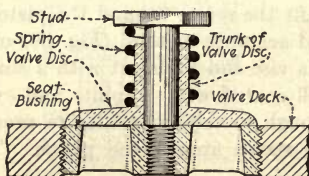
Sectional Elevation Of Bronze Pump-Valve.
